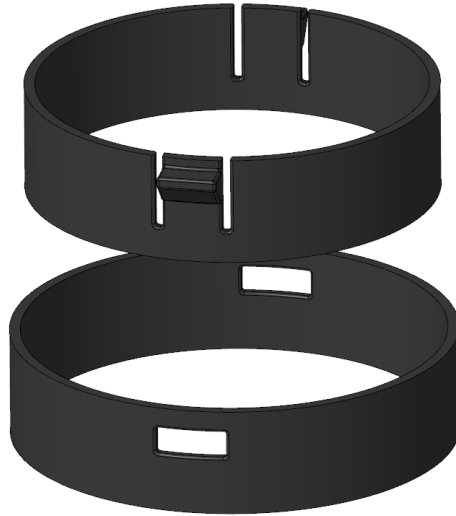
CAD-model showing the fastening concept using snap fits.
